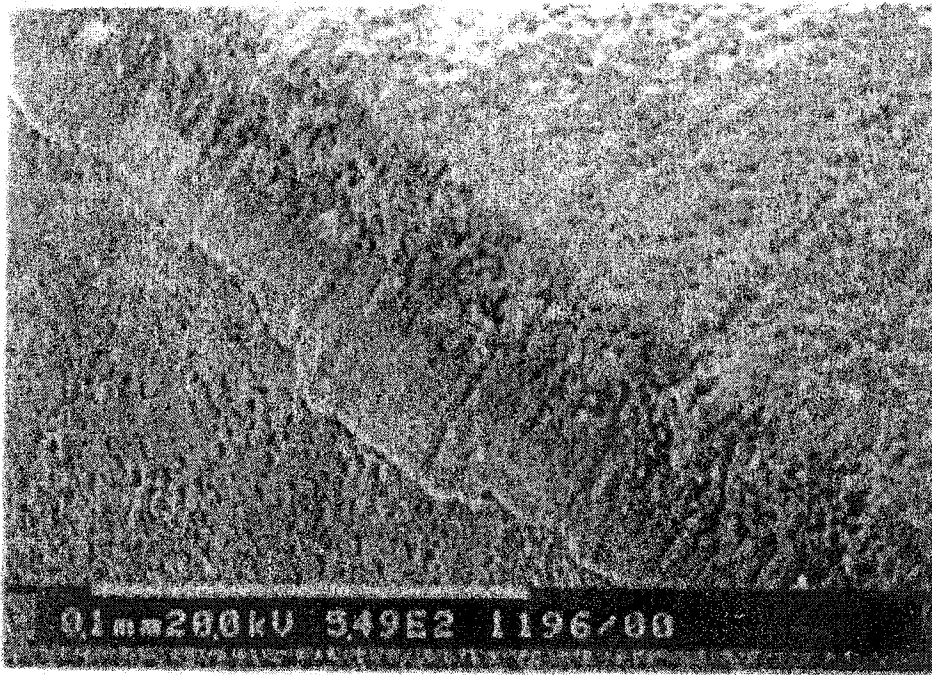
a). Tool wear at low cutting speed (10000 RPM, $f=0.025\text{mm/rev}$ AISI H13, 55 HRC)
